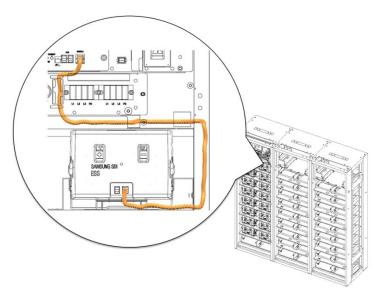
Rack BMS to Module #1 OUT Signal Cable
